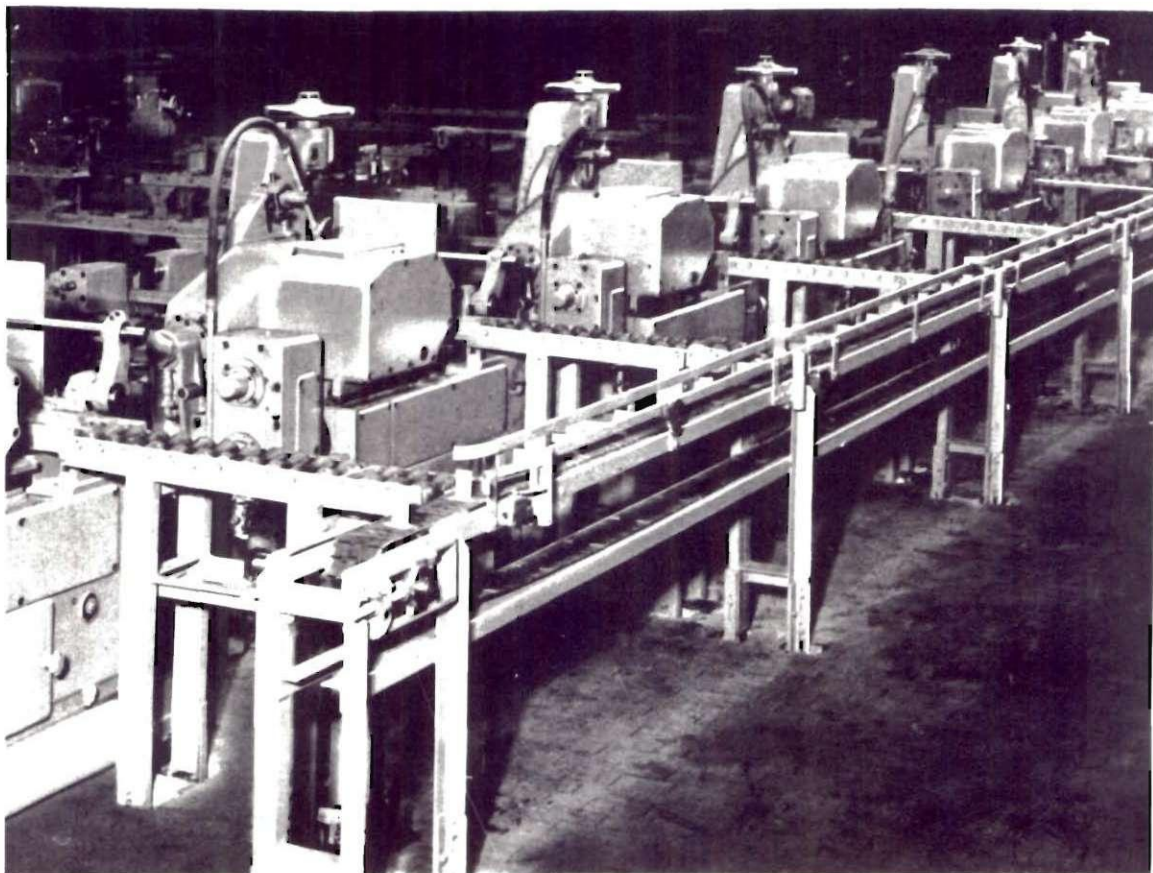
A product-designed conveyor which receives ordnance billets from a bank of cut-off machines and delivers them to the next operation. (Photograph courtesy W. F. & John Barnes Company)
